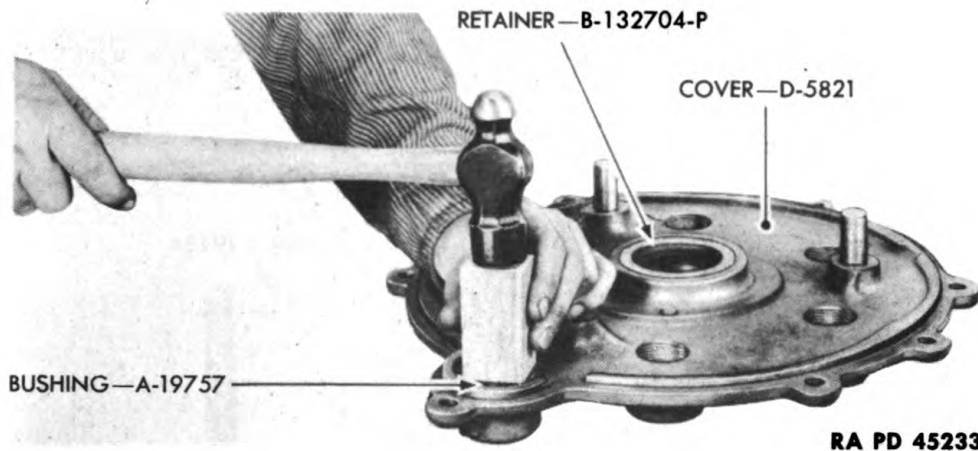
Installing Bushing in Elevating Handwheel Gear Housing Cover
